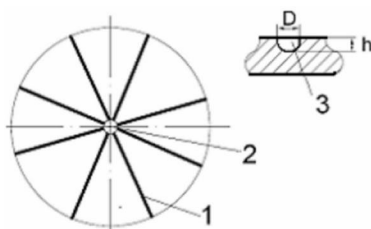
The moulding insert for evaluating the inflow distance of the mass in the mould. 1 – micro-channel, 2 – injection point, 3 – cross-section view of the channel
